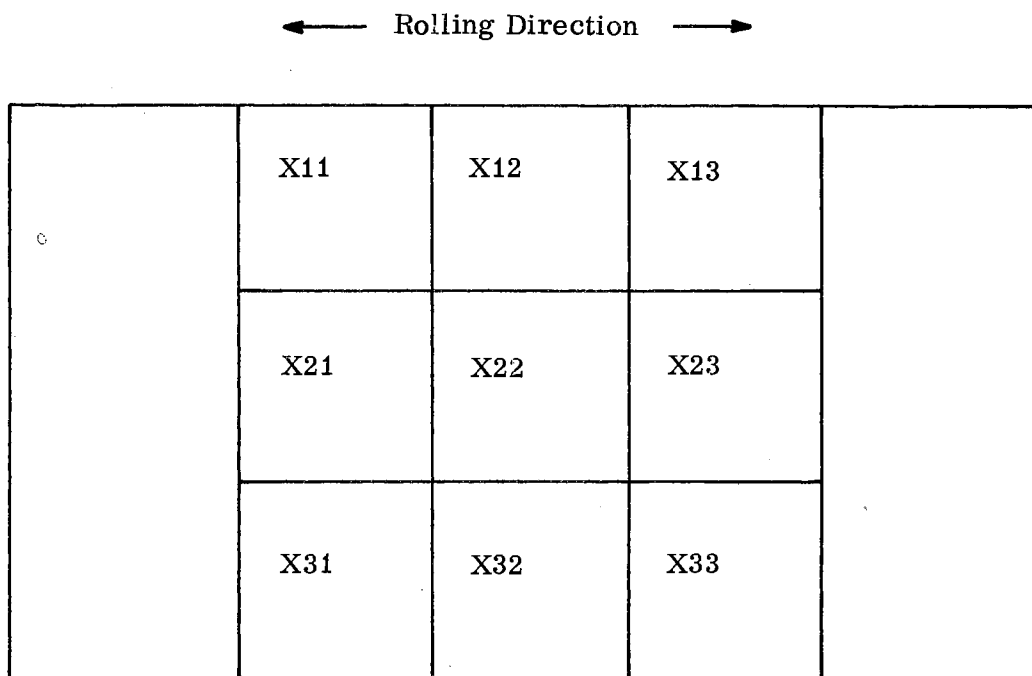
Birefringence Specimen Lay-Out for Rolled Metal Sheet
